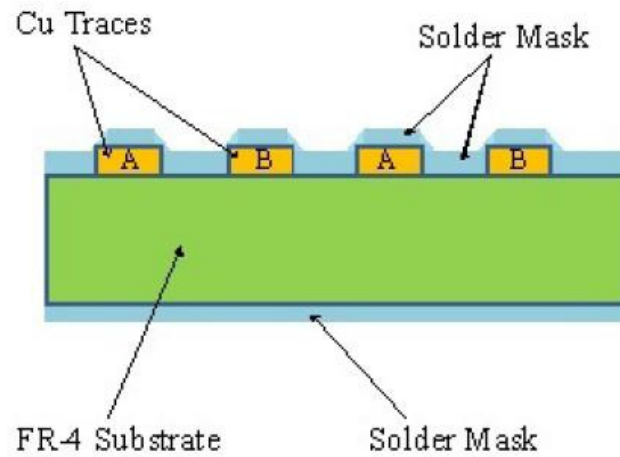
A cross-sectional drawing of interdigitated electrodes realized in the Cu foil on one side of a PCB
